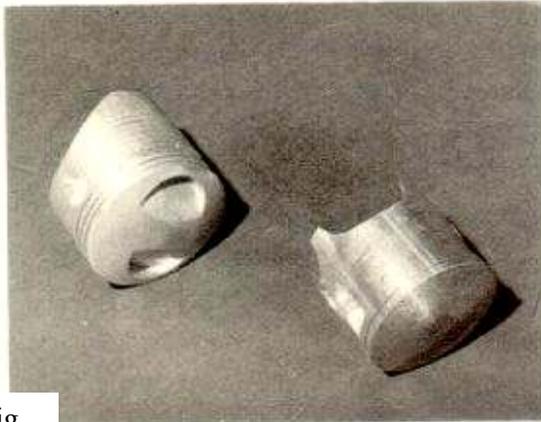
4-stroke and 2-stroke pistons, showing single ring and lighter construction of 2-stroke piston.
